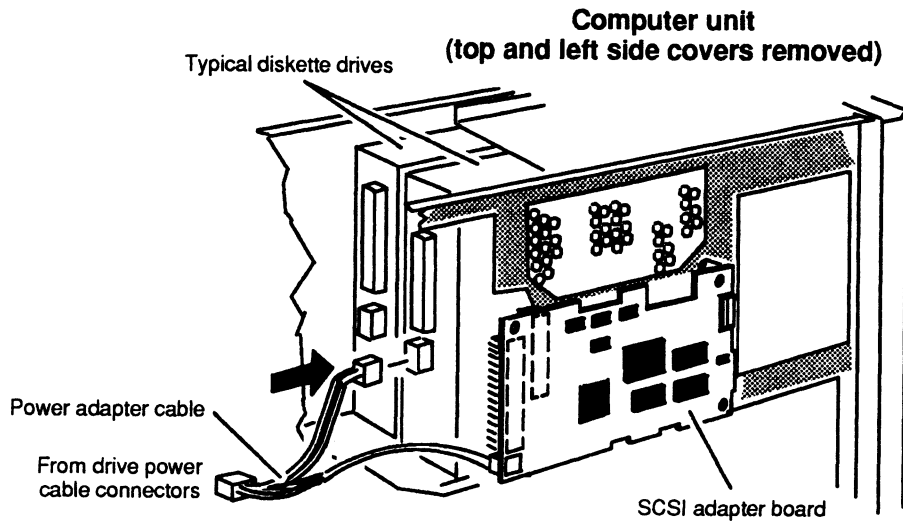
Plugging the Power Adapter Cable into a Diskette Drive
